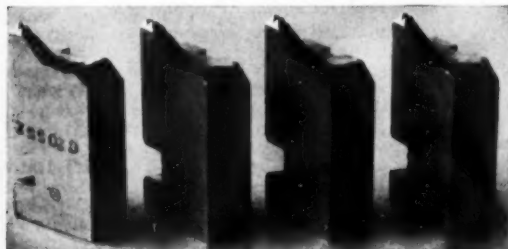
With but one full thread left, these chasers produced several thousands of 1 1/4"-14 threads after previously cutting hundreds of thousands. If all users of chasers repeated this feat, chaser manufacturers would need supporting side lines. However, this one lesson represents a full course in chaser upkeep.
